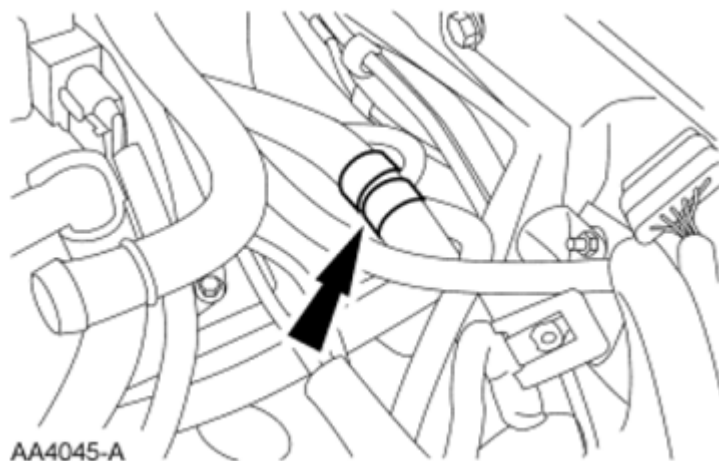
Locating Knock Sensor (KS) Electrical Connector And Wiring Harness Pin-Type Retainer
